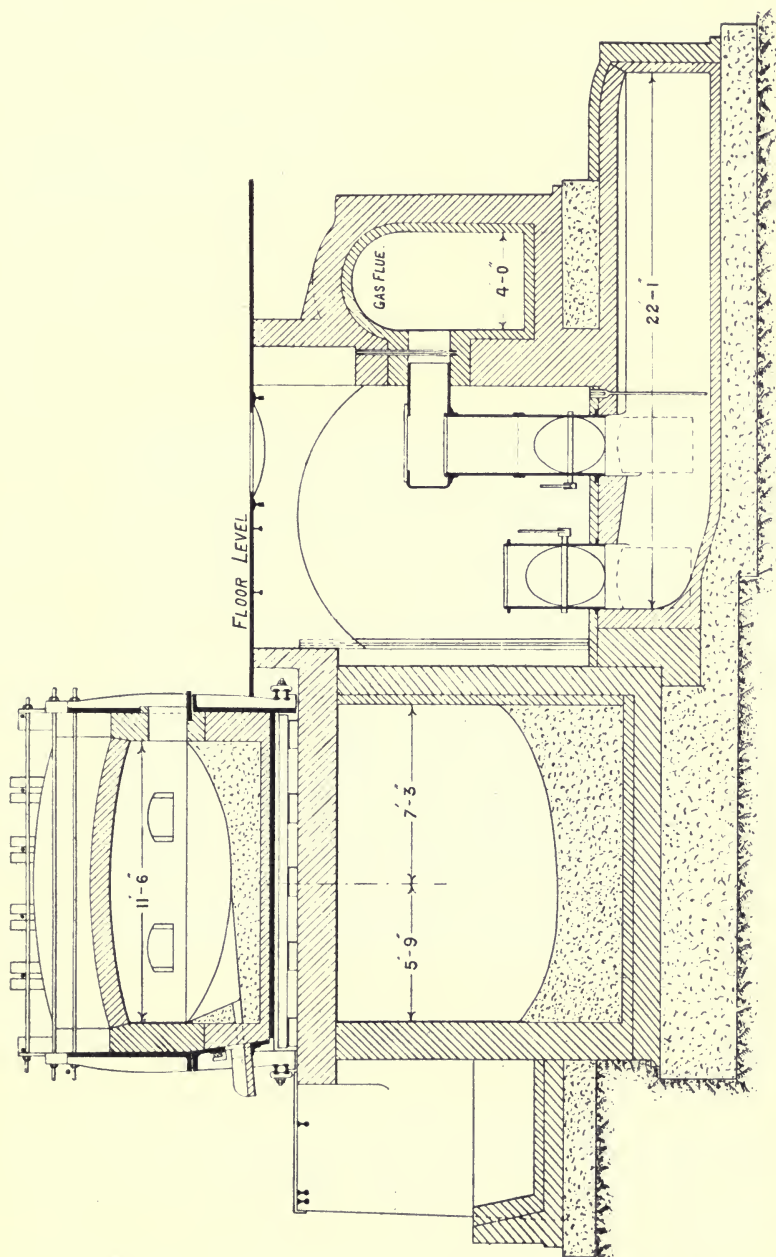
Twenty-five-ton Steel Furnace, Cross Section.
